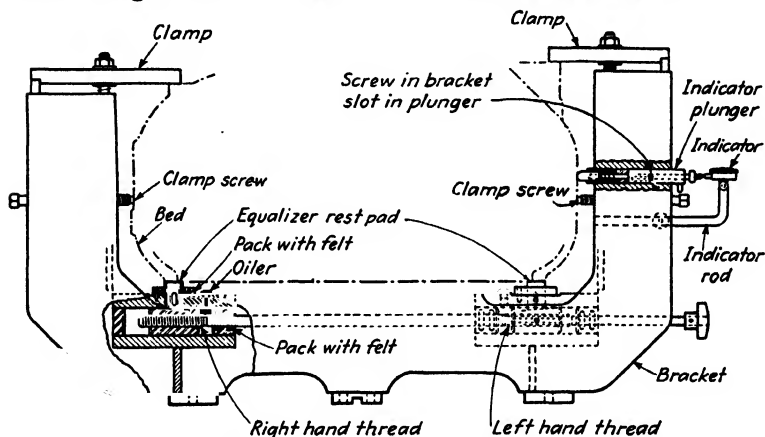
Special Warner and Swasey fixtures for boring mill.
